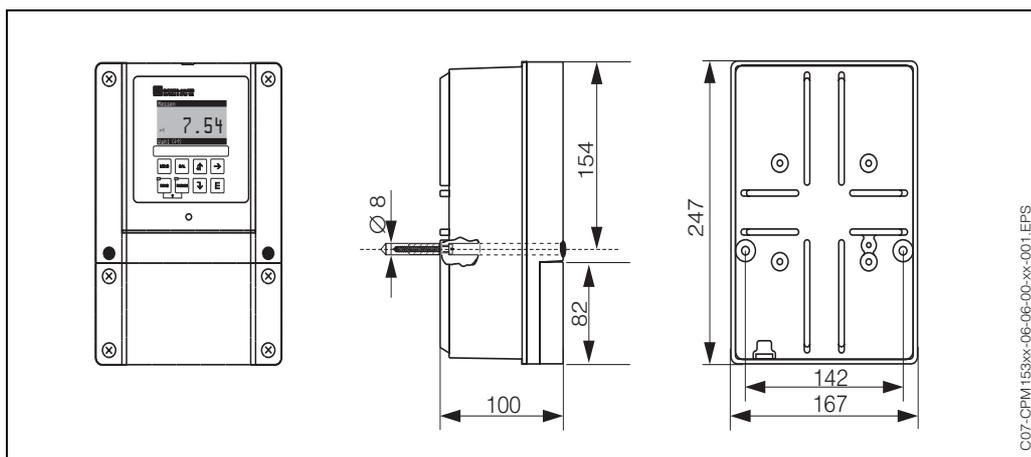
Dimensions of transmitter Mycom S CPM 153.
